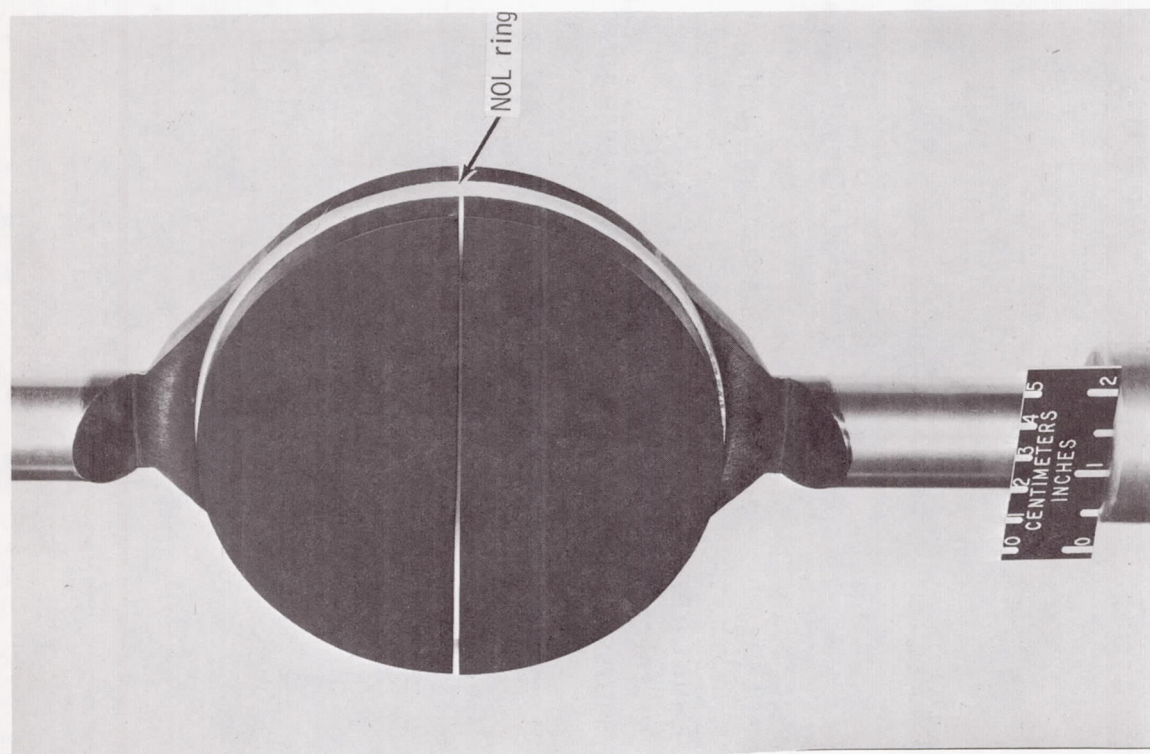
Boron NOL ring and belt specimens positioned in split-D test fixtures.
